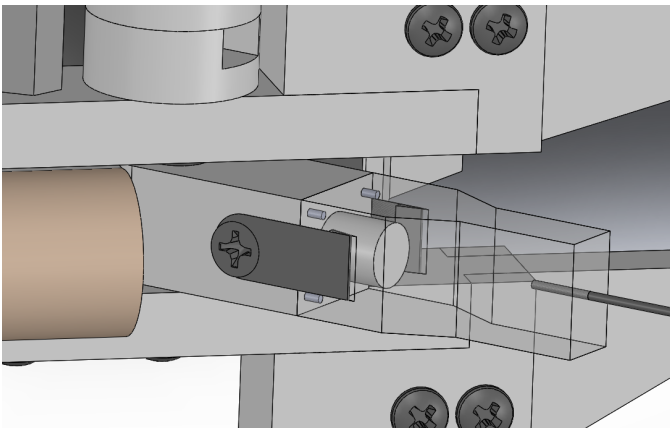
The original gauge mount design, shown transparent to provide vision of the mounting pins.
